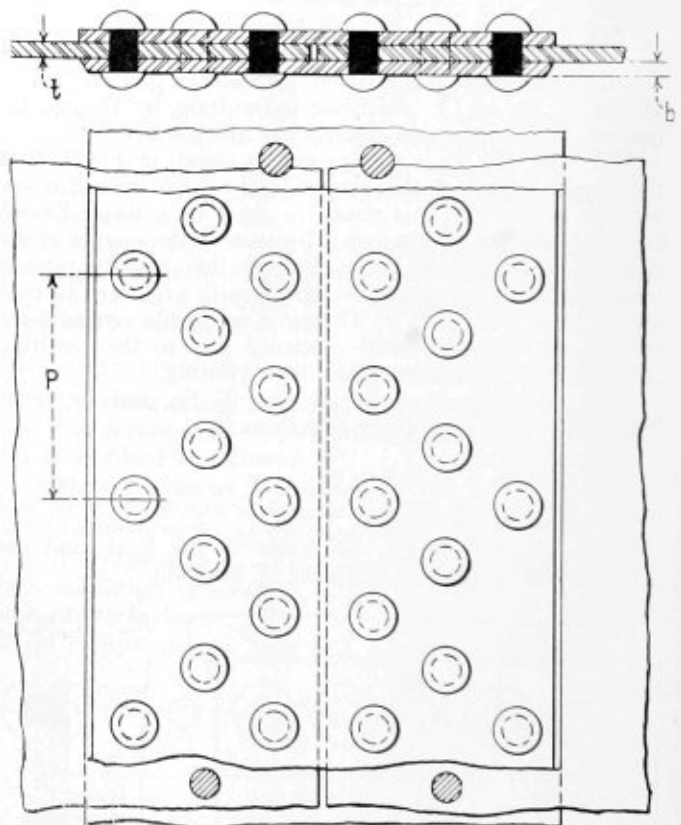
Special Triple Riveted "Double Shear" Joint
